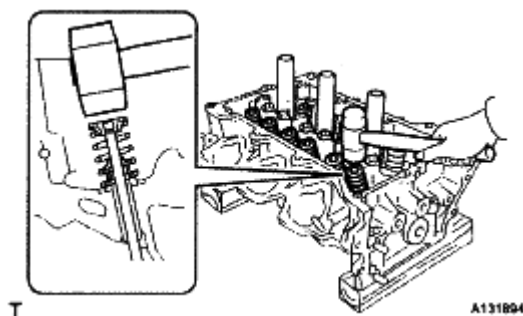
Tapping Valve Stem Tip To Ensure Proper Fit
